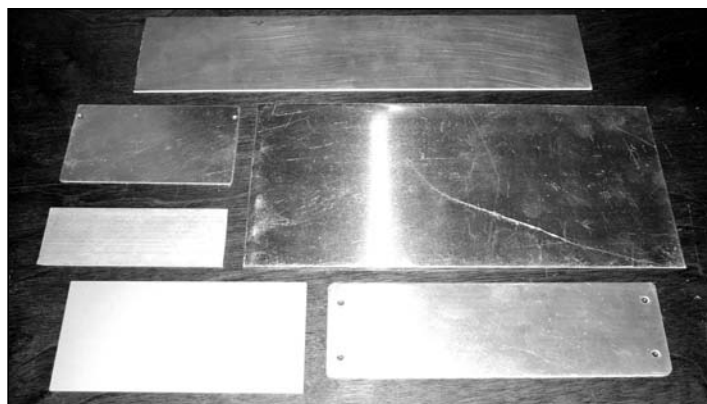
A shear makes it easy to make straight, clean cuts in sheet stock. Most often, I use 0.062 (1/16") stock.
